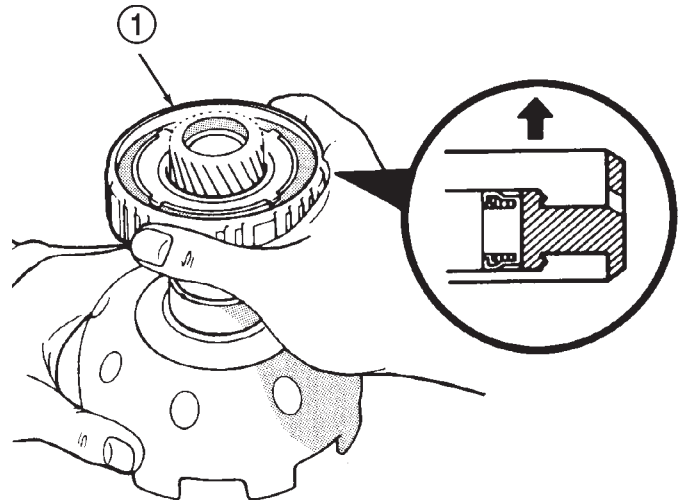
Installing Clutch And Hub Assembly On Sun Gear
